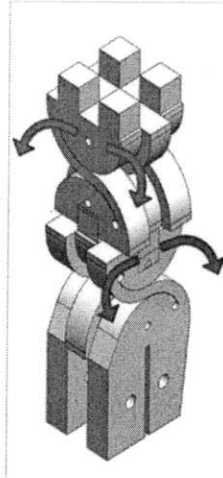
Squishbot1 CORE joints stacked perpendicular to each other to achieve two DOF.
